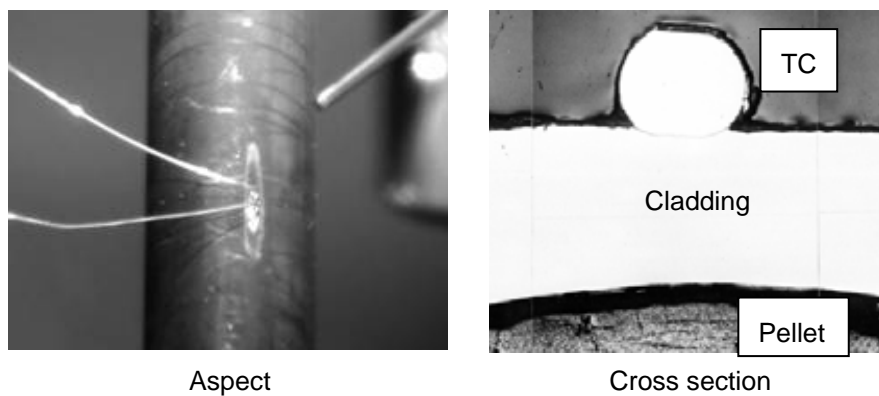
Aspect and cross section of cladding after spot-welding of thermocouple
